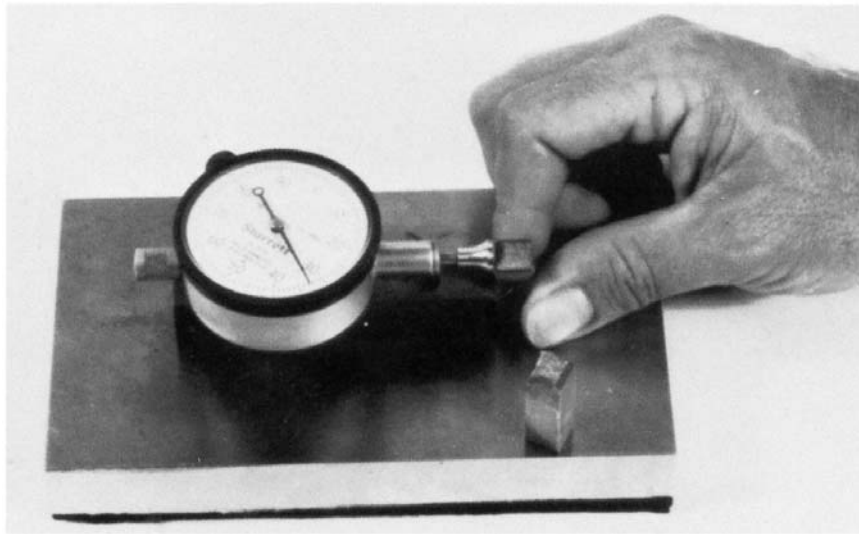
Lateral Expansion Gauge for Charpy Impact Specimens
